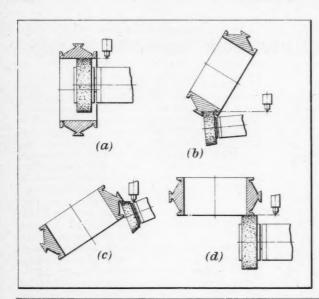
Four stages in grinding the bearing ring are here shown diagrammatically. At the end of the sequence, the ring is removed and turned end-forend, to enable the remaining faces and track to be ground
